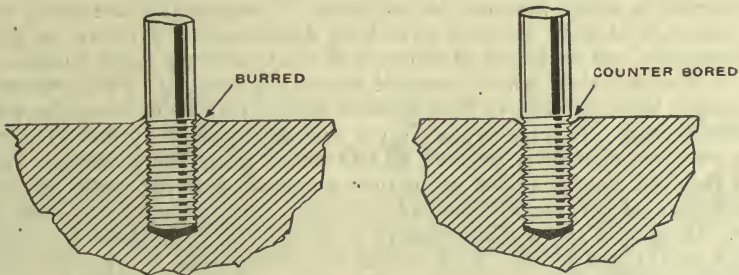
Method of counterboring to relieve tight point on cylinder head assembly.
